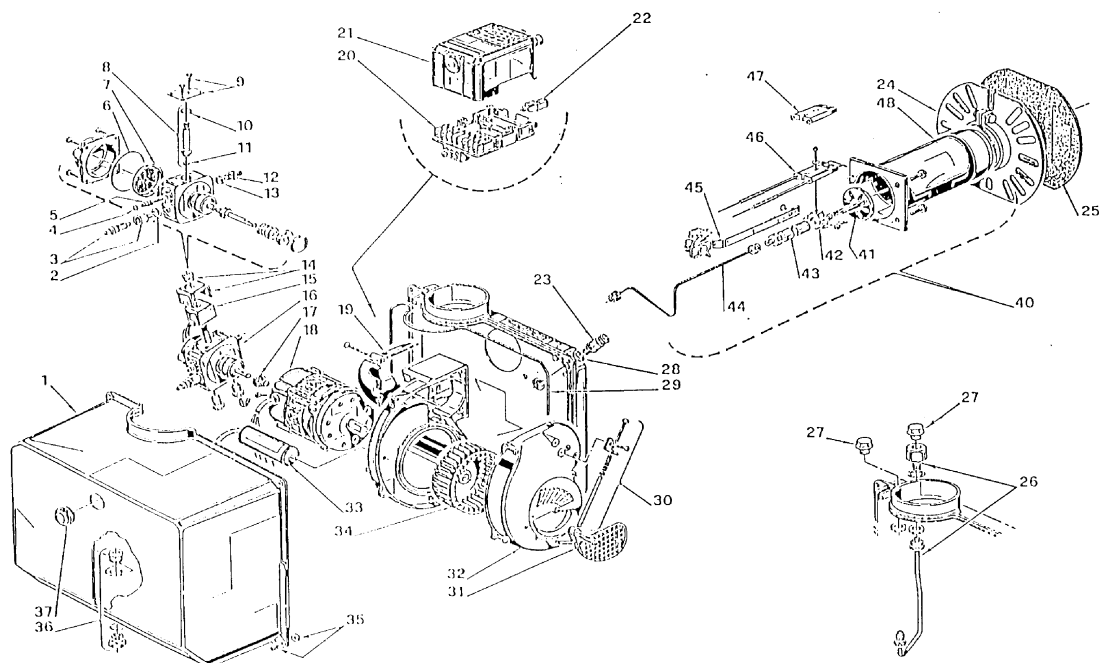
RIELLO BURNER MODEL 40 BF3 & BF5 EXPLODED ASSEMBLY
